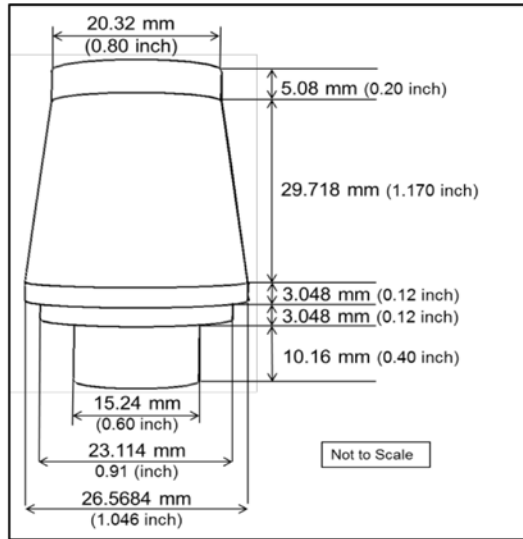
Dimensions of the draw-plug used to assemble the annular target with the 6061-T4 Al cladding.
